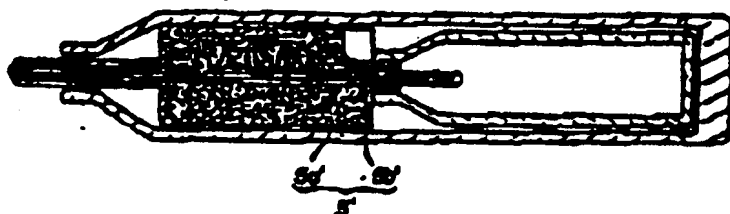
is a frontal cross-sectional view of the 1st embodiment example in this invention, and Drawing 2 is a frontal cross-sectional view of the 2nd embodiment example in this invention.
